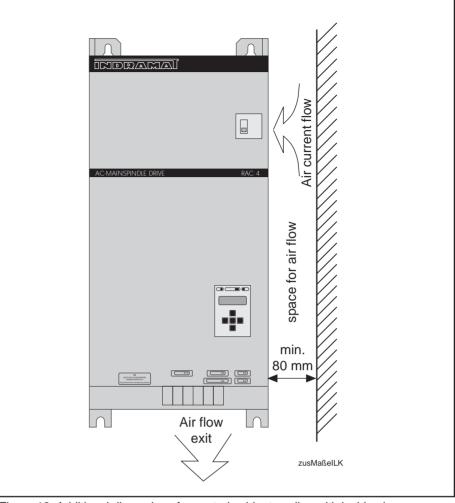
Additional dimensions for control cabinet cooling with inside air.
